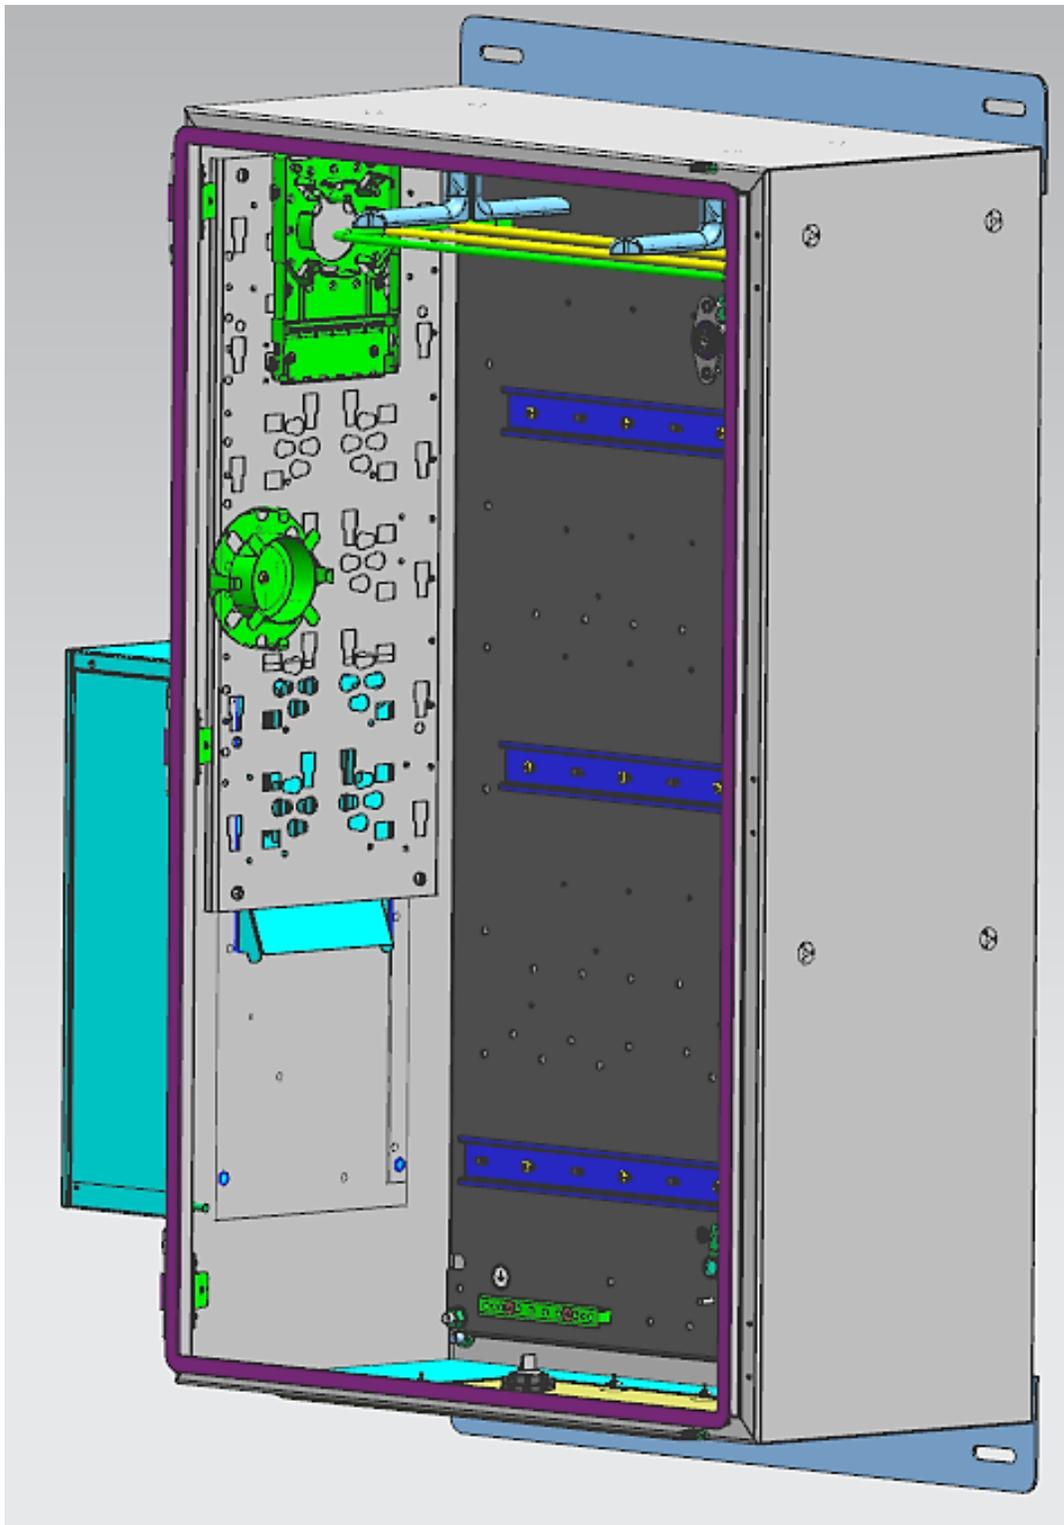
Interior view showing the location of the T15 discharge with the mounting bracket on the interior of the Z23 enclosure. The bracket needs to be removed to access the upper mounting holes for the T15. The discharge duct sits above the power shield (not shown).
